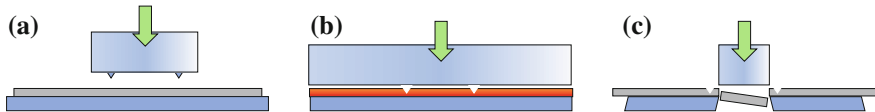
Schematic of cutting with notch: a the notch is formed before the b hot-stamping process. c The blank is then hard cut (re-created after [10])
